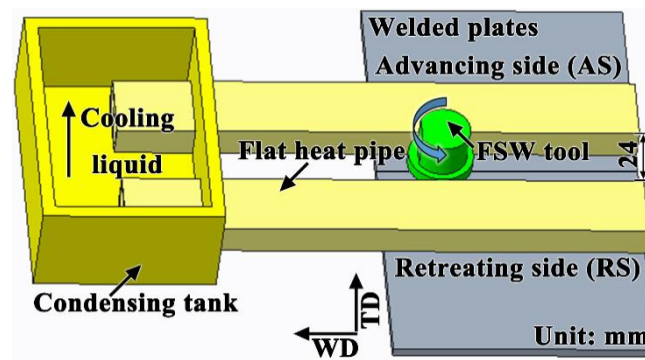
Schematic illustration of the setup of heat pipe-assisted friction stir welding (HFSW). The welding direction is marked as WD and the direction perpendicular to it is marked as TD.
